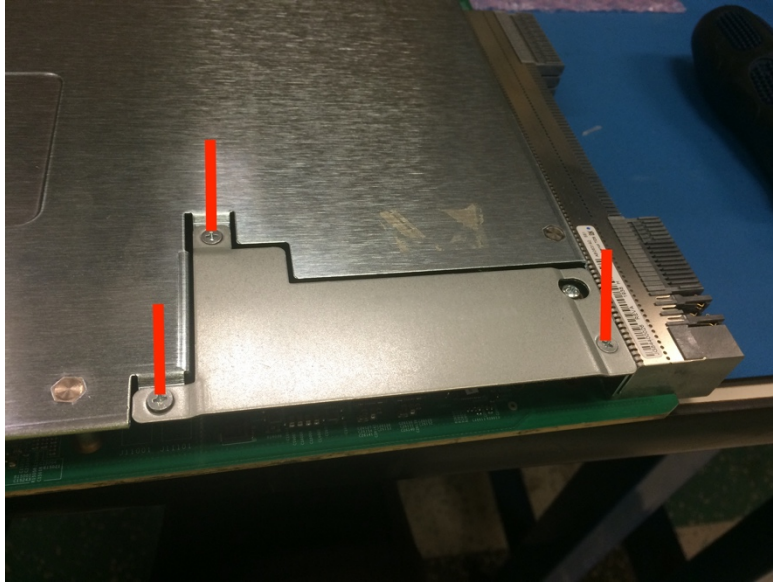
MX-SPC3 Top View Showing SSD Cover Plate
